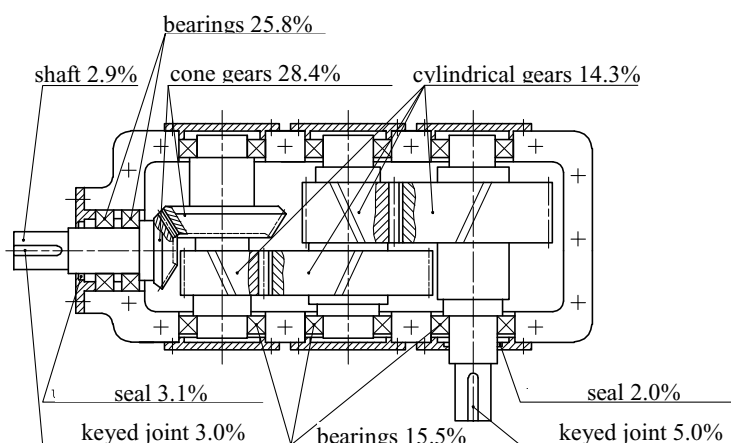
Structure of damage in components of a helical-bevel gearbox of a mining scraper conveyor drive
